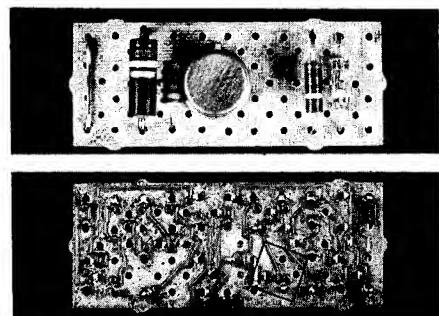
Copper leads welded to printed copper epoxy board.
